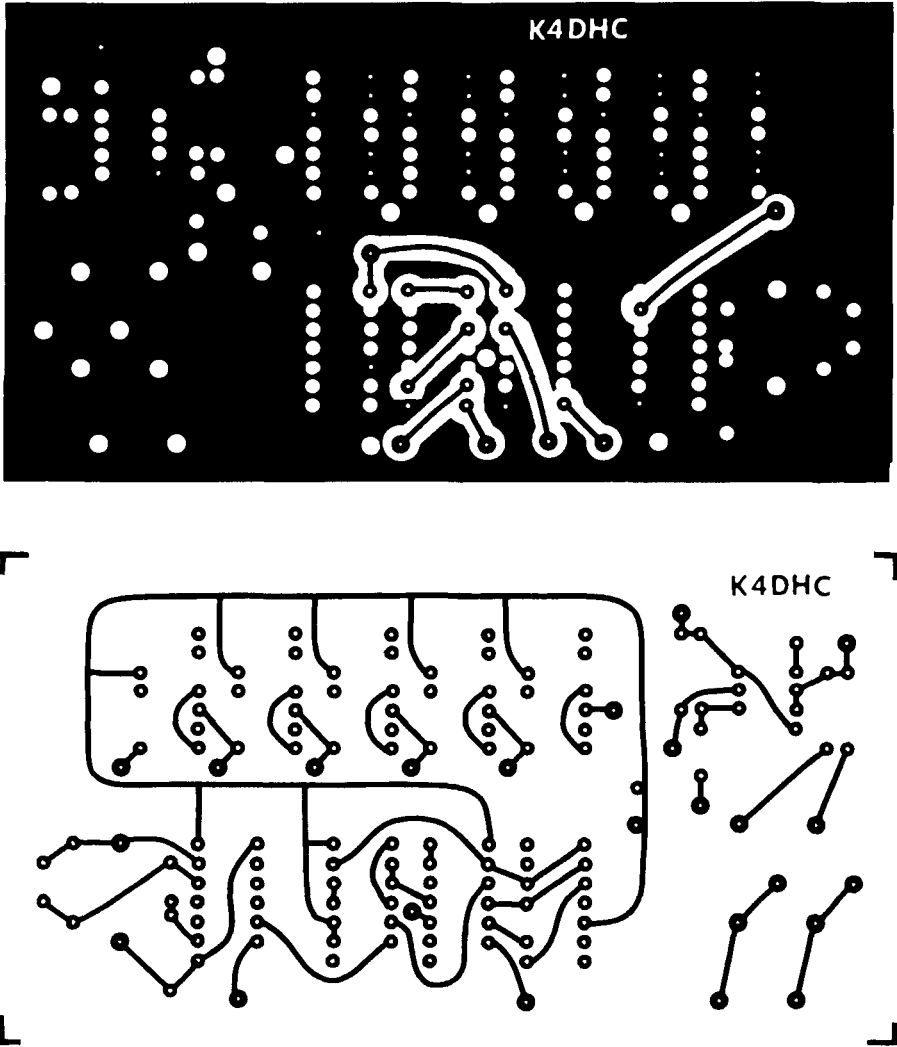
Full-size layout for both sides of the double-sided circuit board.
